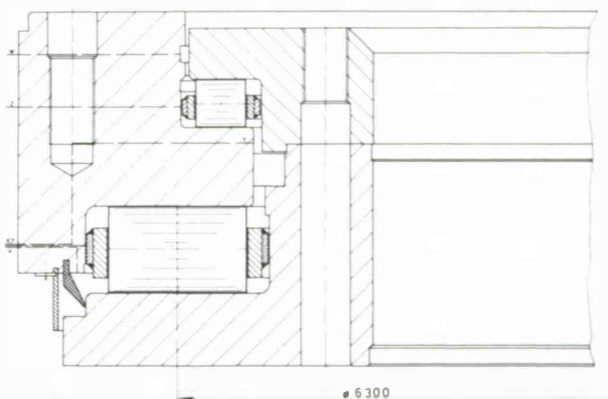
Roller bearing for bucket wheel excavator in the oil sand open-cut.
